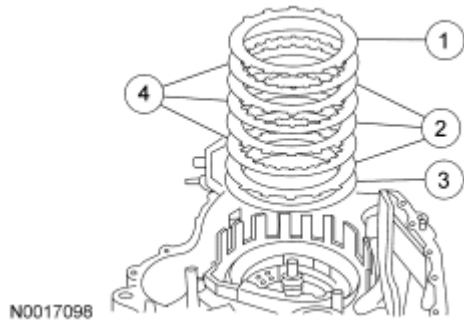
Identifying Low/Reverse Clutch Pressure Plate, Low/Reverse Clutch External Spline Clutch Plates (Steel)
